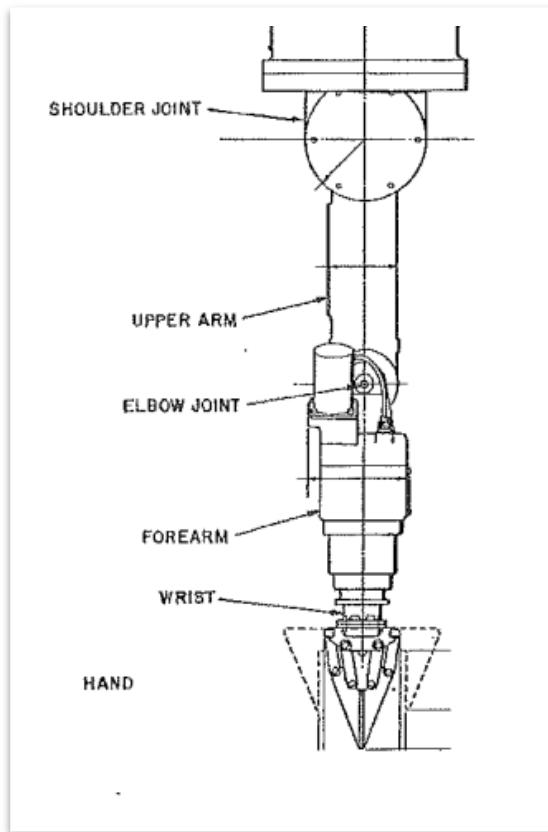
Drawing of the current manipulator without wrist pivot joint
